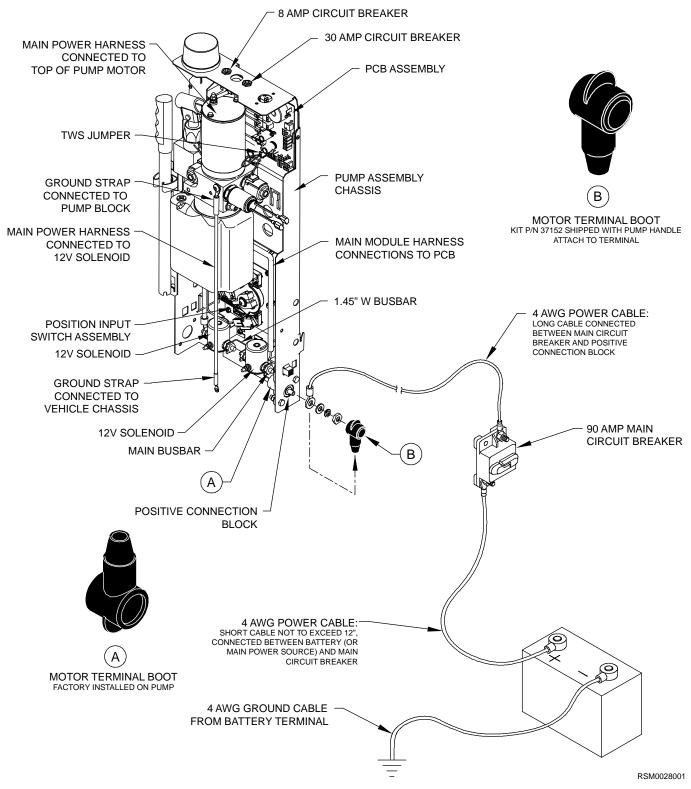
ELECTRICAL INSTALLATION DIAGRAM
